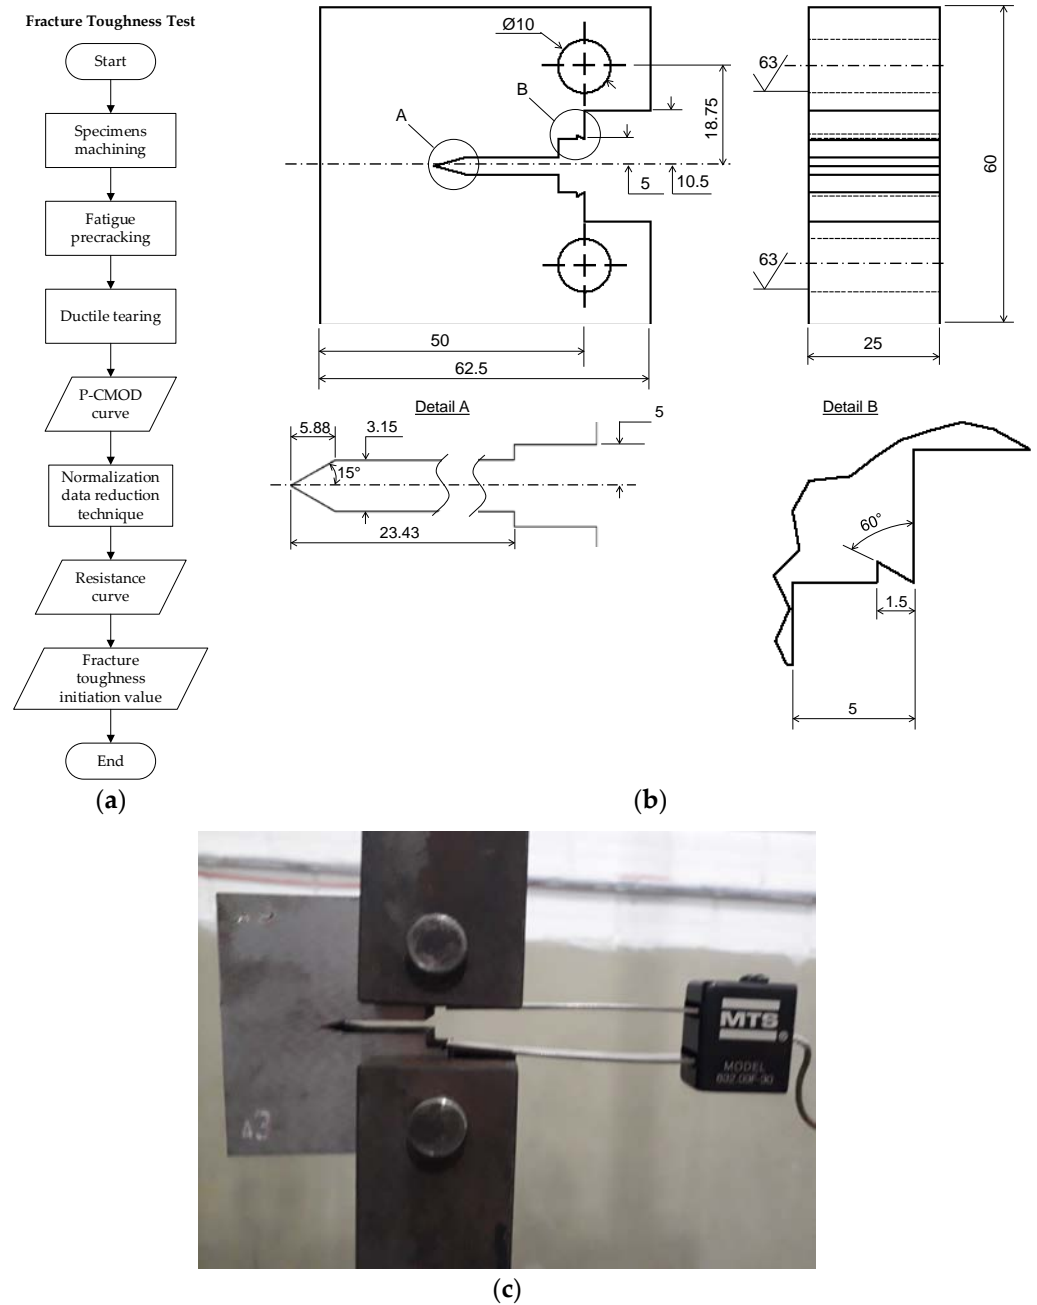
(a) Flowchart of the adopted fracture toughness test. (b) Drawing of the CT fracture toughness specimens (dimensions in mm). (c) One CT specimen assembled for testing.
